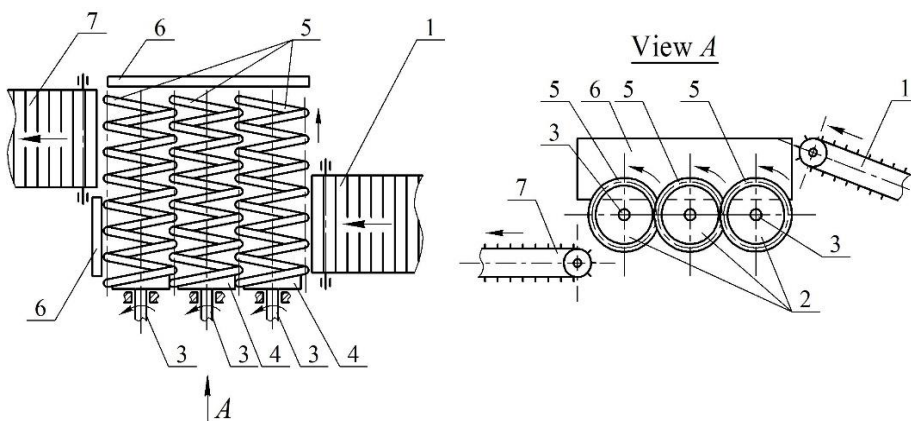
Schematic model of the potato heap separator of improved design: a – top view, b – side view; 1 – feeding conveyor; 2 – cantilevered spiral springs of cleaning rolls; 3 – power axle; cleaning roll; 4 – hub; 5 – spirals; 6 – protective apron; 7 – discharge conveyor.
